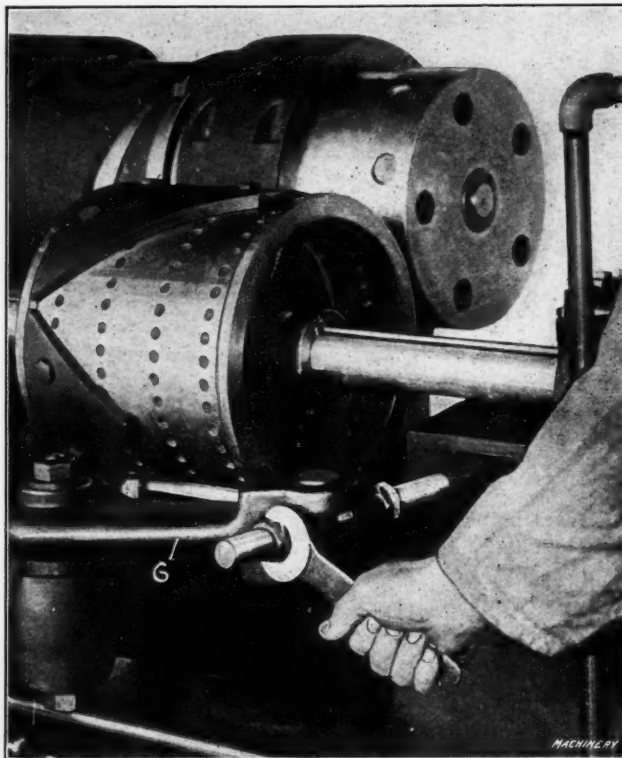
The Adjusting Nuts on the Connecting-rod are for the Accurate Setting of the Cross-slide Tools
